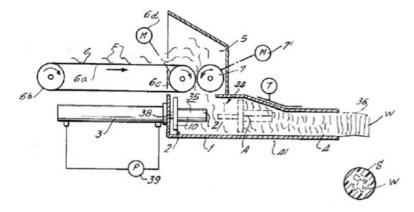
Cross-sectional view of the compacting apparatus (1973, DE2261678 FLUMS AG MASCHF). A, Axis; IA, Line; M, Scraps of polyethylene film; S, Sheath; T, Thermostat; W, Compact sausage-like body; 1, Housing/compressing cylinder; 2, Ram/compressing piston; 3, Hydraulic cylinder/drive; 4, Funnel; 5, Feed casing; 6, Conveyor belt; 6a, Horizontal transport belt; 6b, 6c, Rolls; 6d, Electric motor; 7, Feed rollers; 7', Electric motor; 10 Circular disc; 21, Cylindrical plunger/projection; 34, Chamber; 35, Inlet; 36, Outlet; 38, Piston rod; 39, Pump; and 41, Heater.
